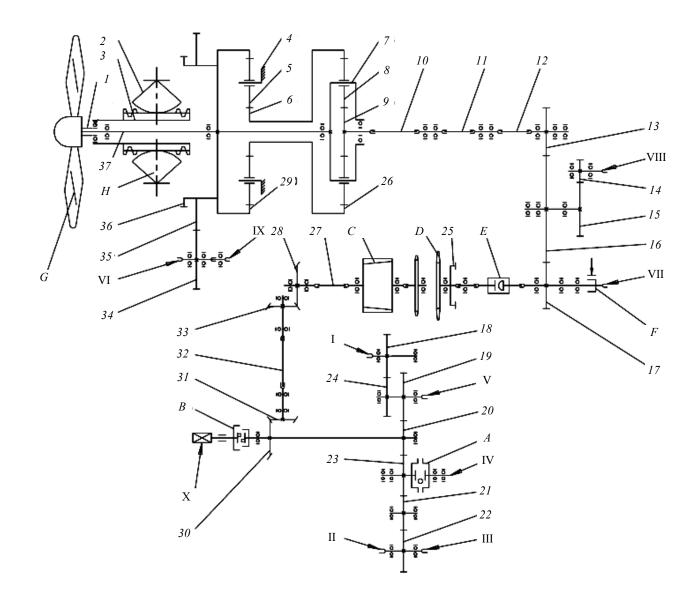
The TB3-117TMA-CEM engine kinematic diagram: *1* — propeller blades turning mechanism; 2 — toothed segment; 3 — toothed rack;
